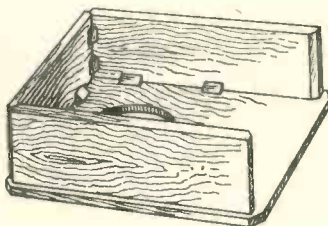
ASSEMBLING THE TOP COMPARTMENT.
